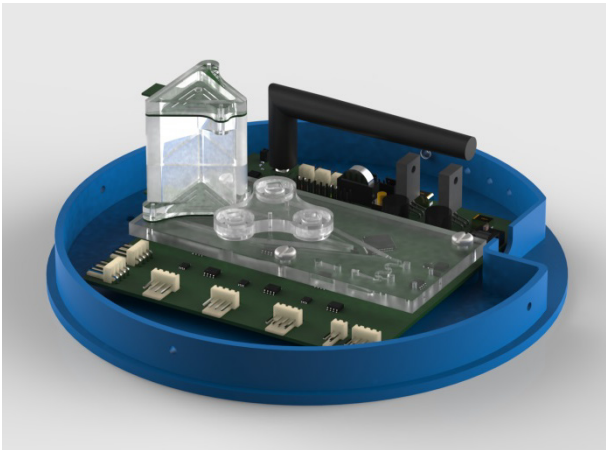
CAD drawing of the fluidic platform integrated into the Intasense prototype.
